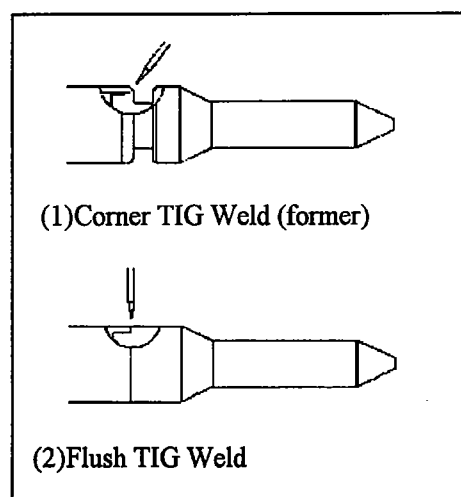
Corner TIG Weld and Flush TIG Weld
